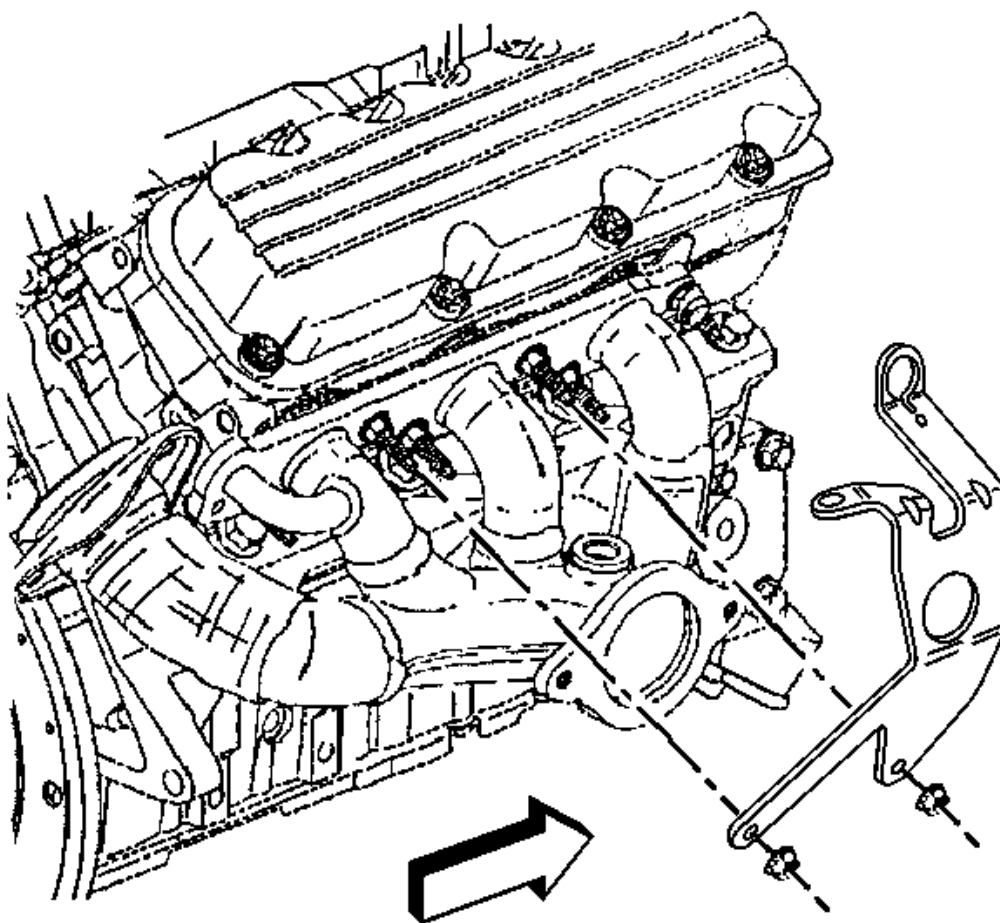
Fuel Injector Sight Shield Cover Bracket
